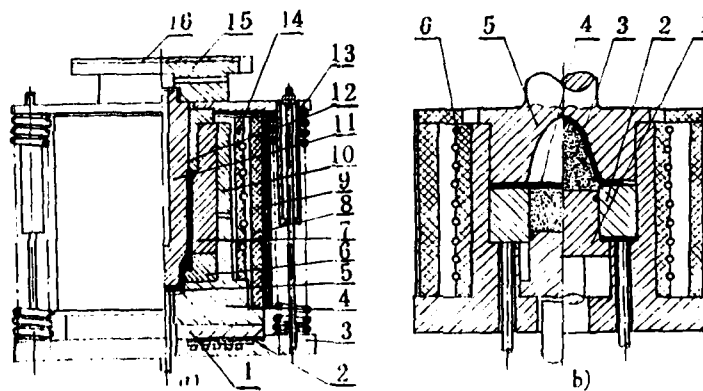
The dies are used forging (or extrusion) a) and powder forming b).
